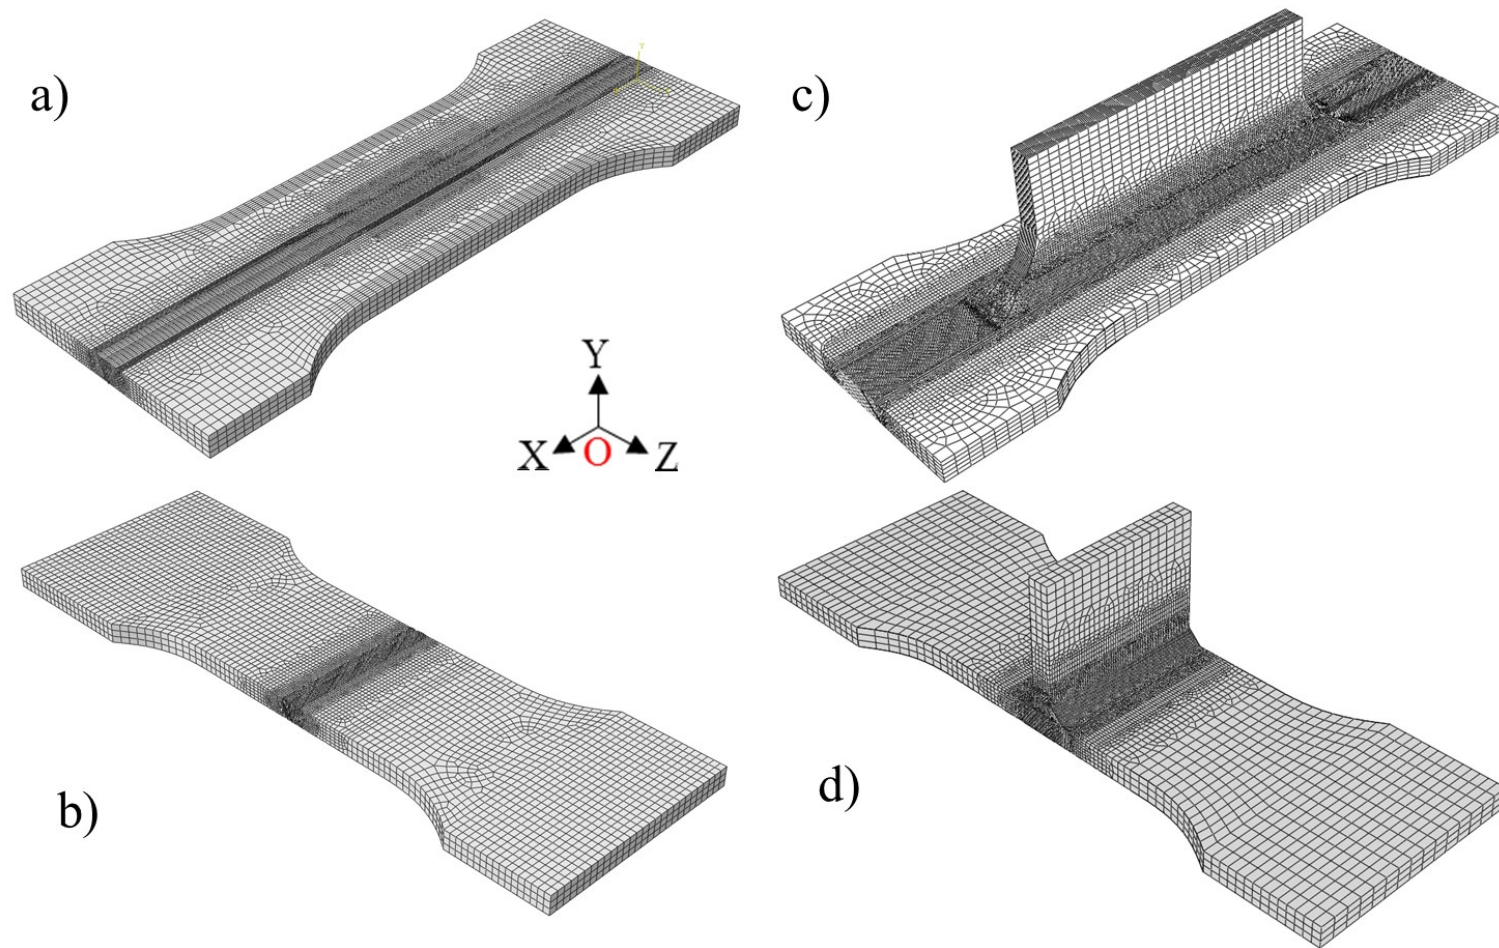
Model geometry after implementing EDM cutting simulation on the mechanical weld simulation model: a) Butt welded plate with long weld, b) butt welded plate with short weld, c) fillet welded plate with long weld and, d) fillet welded plate with short weld.
